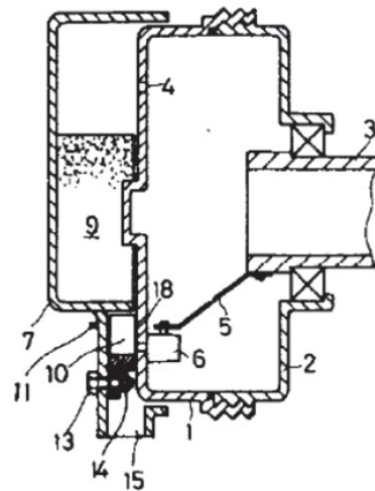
depicts a cross-sectional view showing a vacuum seeder using an exemplary guide device, and Figure 2 is a cross-sectional view from II-II in Figure 1. Ex. 1011, 4:27–30.
